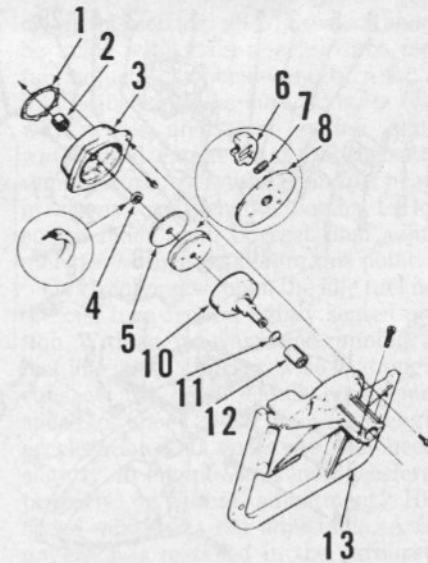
A—Exploded view of ST-400 clutch assembly.
